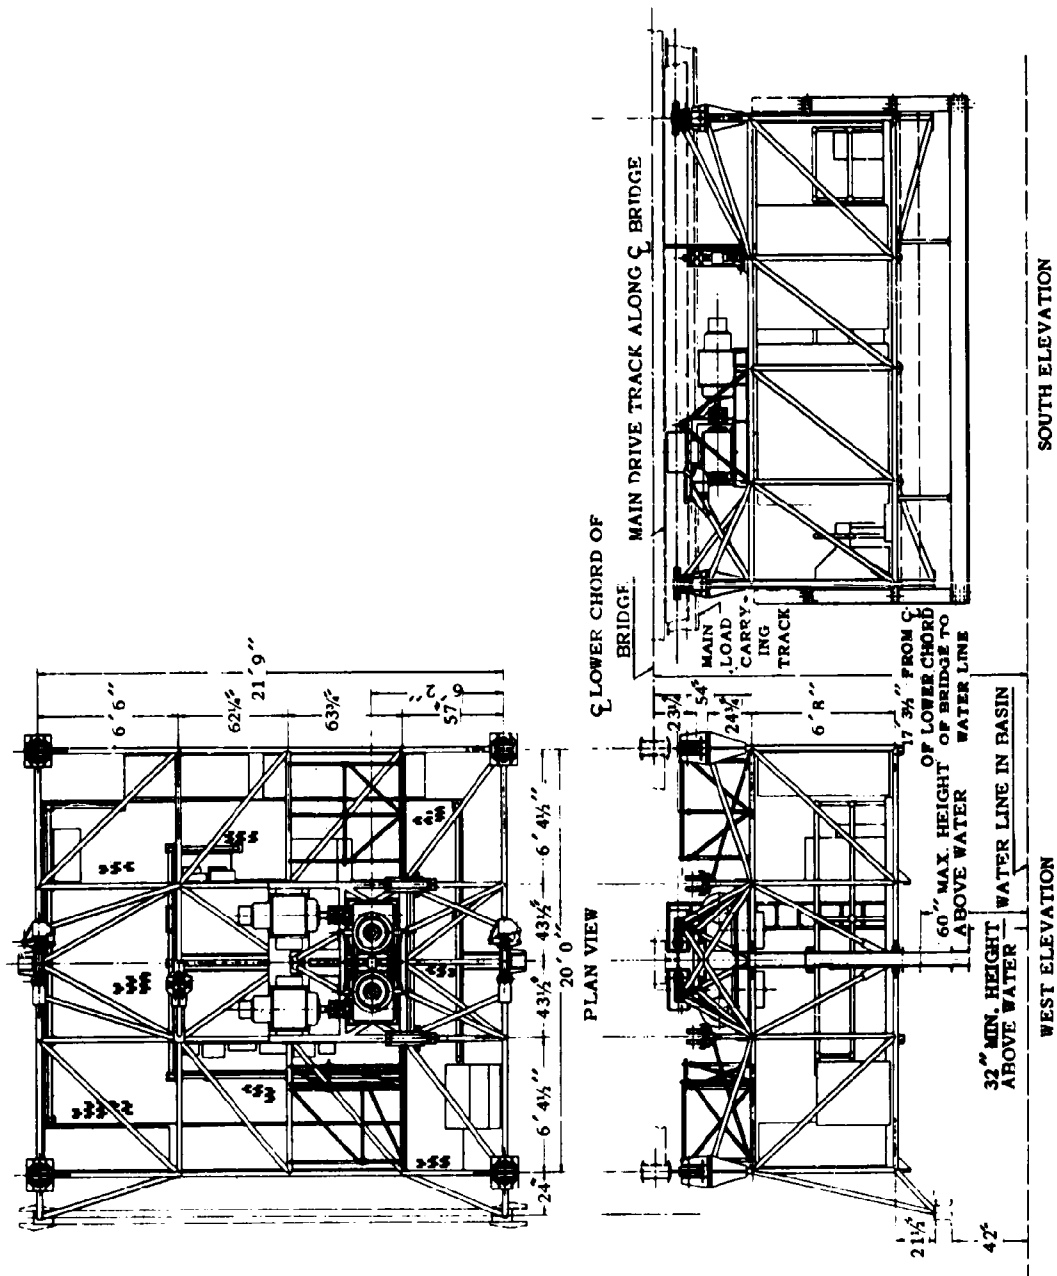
Maneuvering and Seakeeping Basin Towing Carriage Assembly
